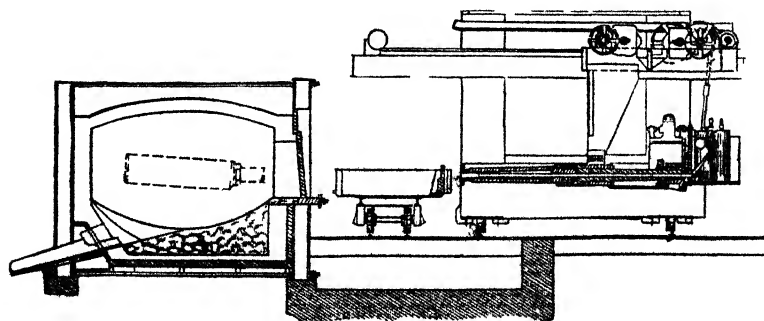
"High-type" charging machine and position of charging box when ready to dump This shows also arrangement of tap hole and spout in stationary furnace
